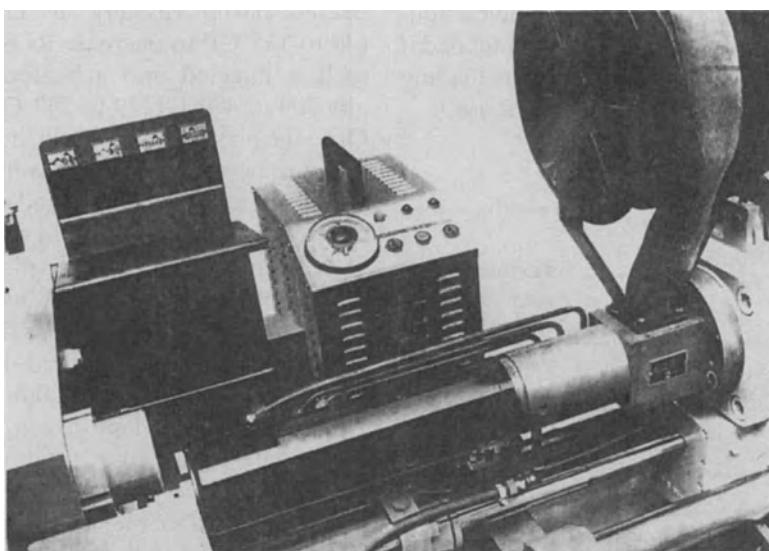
Negri Bossi 12-80-ton FA molding machine equipped for injection molding of TS elastomers. Note the special barrel provided with a jacket that allows circulation of the conditioning fluid (heating and cooling control), and note on the right-hand side the support with its reel holding the band of elastomer to feed the barrel.
